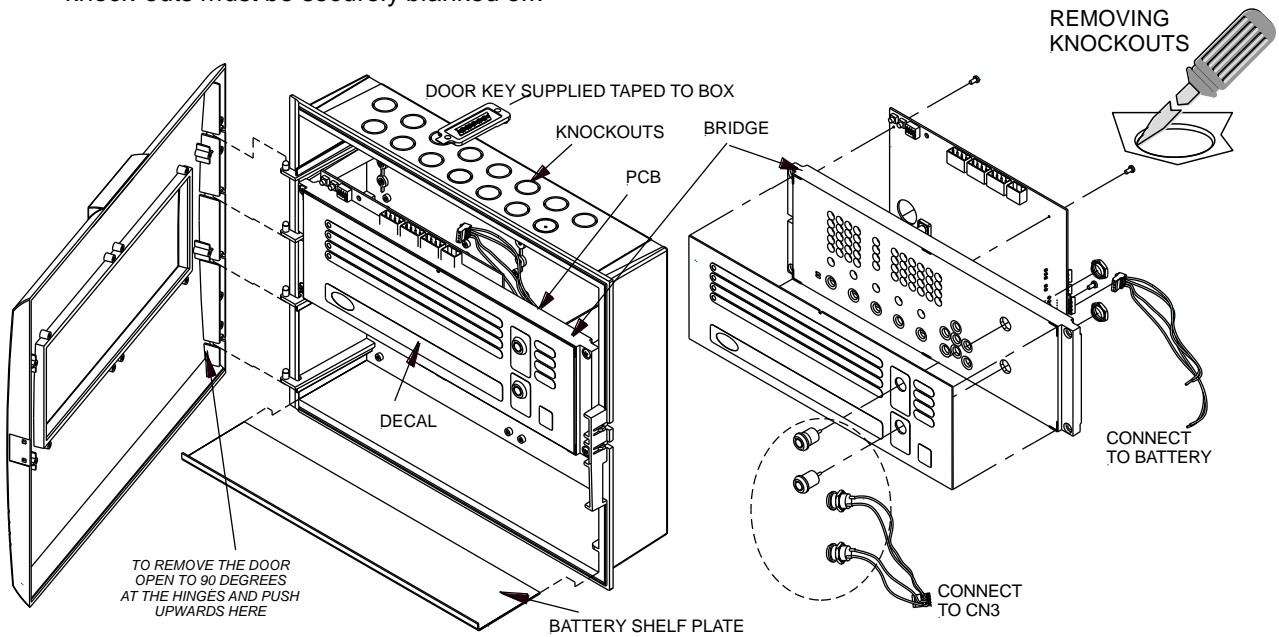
Explode View of the Basic Assembly with Side Entry Key (BX1)
